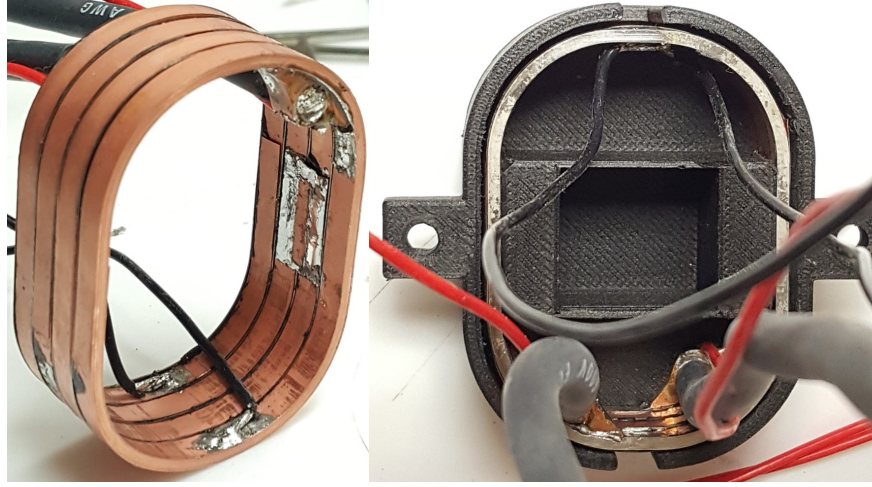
Key steps in the improved procedure for fabricating superconducting rotor coils for the HEMM.
